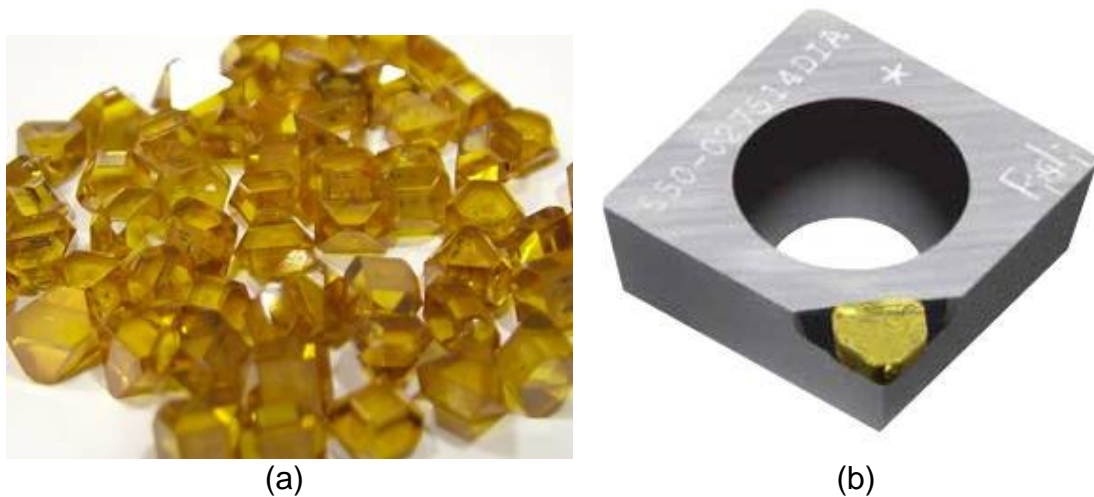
Mono-crystalline synthetic diamonds for requiring an ultra-high quality surface finish (© 2013 FiudiSrl): (a) manufactured in HTHP processing (BECKER Diamantwerkzeuge GmbH), (b) inserted with mono-crystalline natural diamond cutting edge
